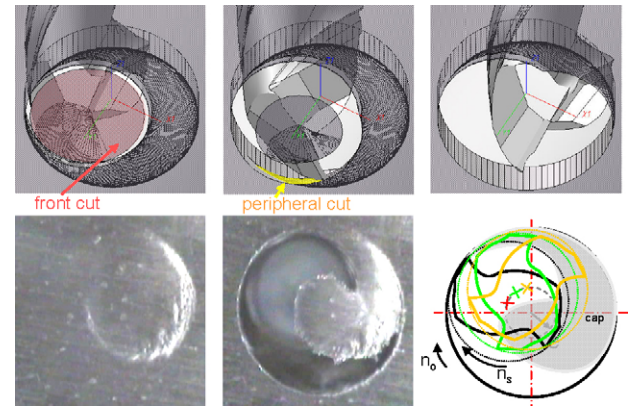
Burr cap formation at tool exit (orbital drilling) [27].
